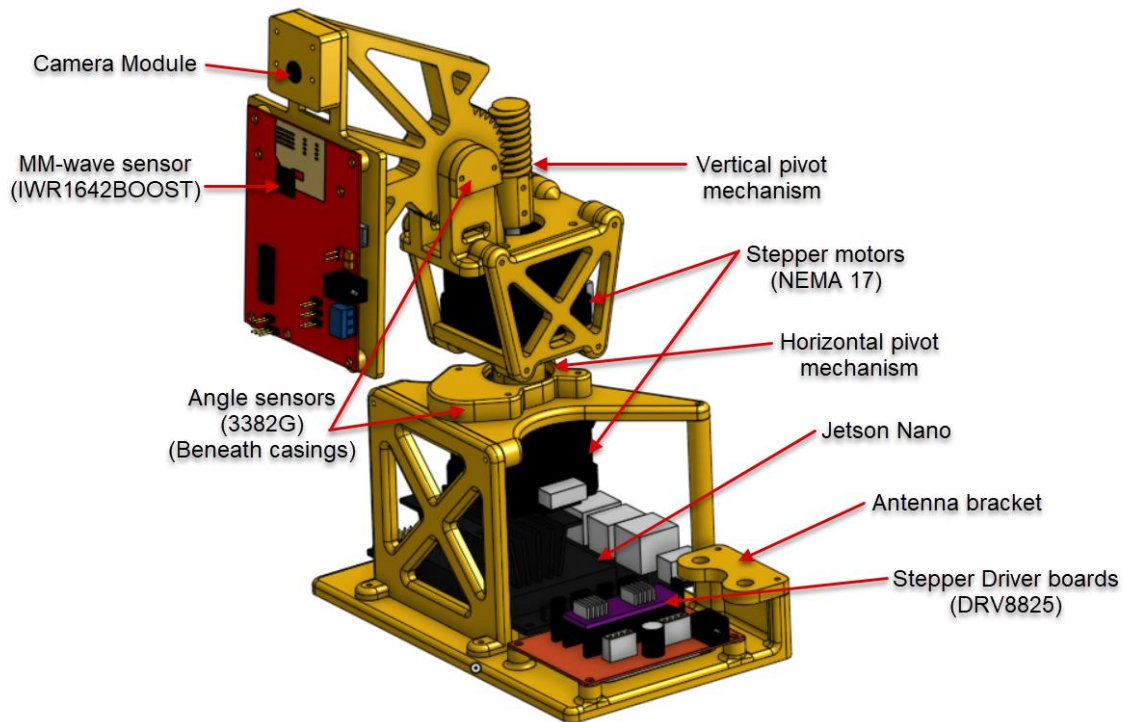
CAD Assembly Of Mm-Wave Camera Tracking System
